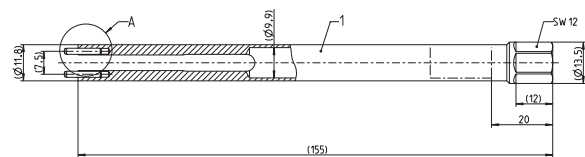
Mounting wrench Ø11,8/SW12 Type 1300A73 for mounting bore Ø12 mm
